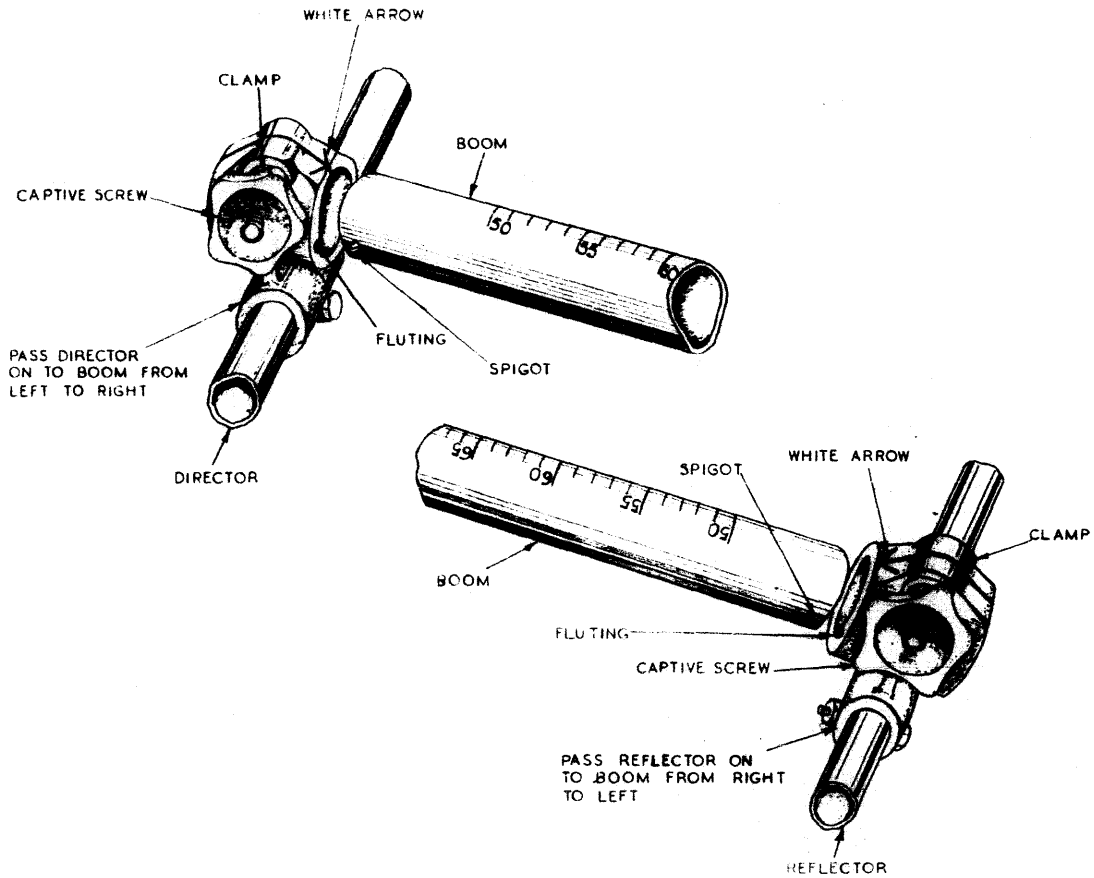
MOUNTING DIRECTOR AND REFLECTOR ON BOOM
